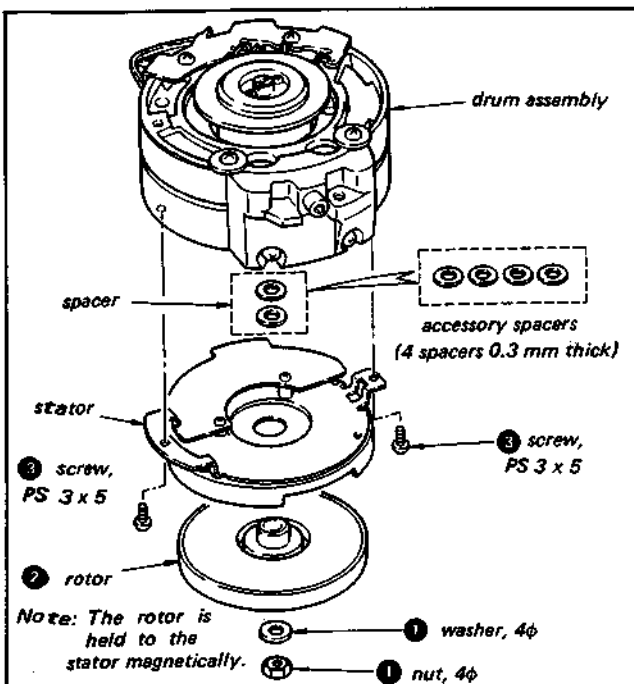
Removal of the stator and rotor when replacing the drum
